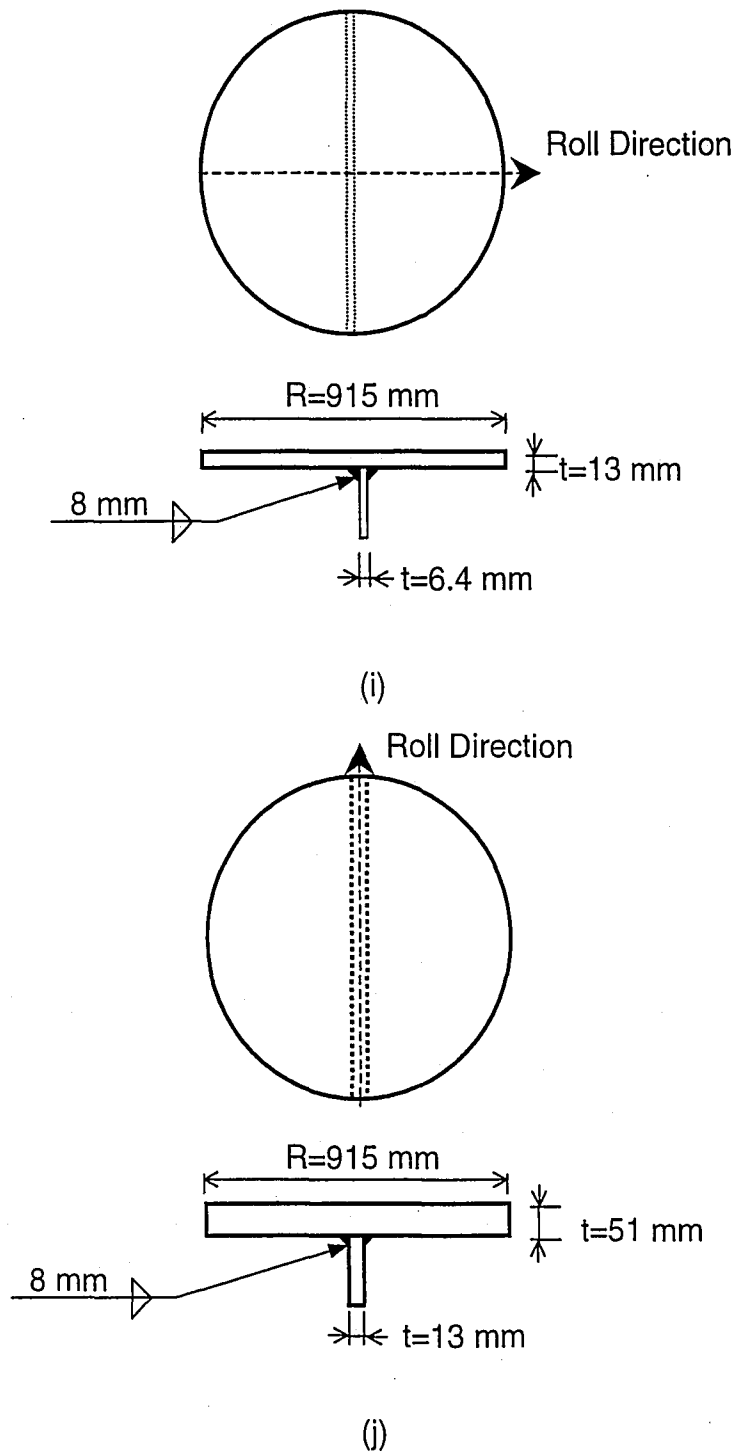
(continued) Plate specimens: (i) P5': stiffener-to-web connection on opposite side; (j) P6': web-to-flange connection on opposite side.
